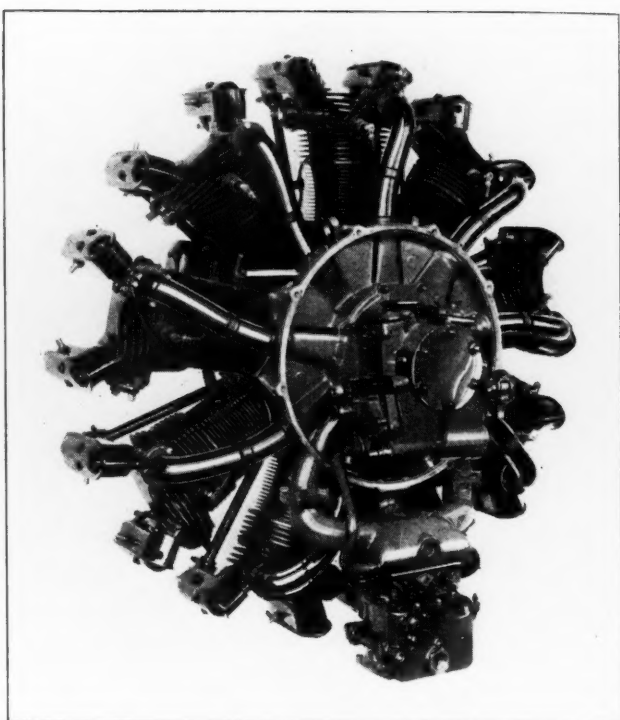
Rear Side of Engine, Showing the Oil-pump and the Special Three-intake Manifold Carburetor
